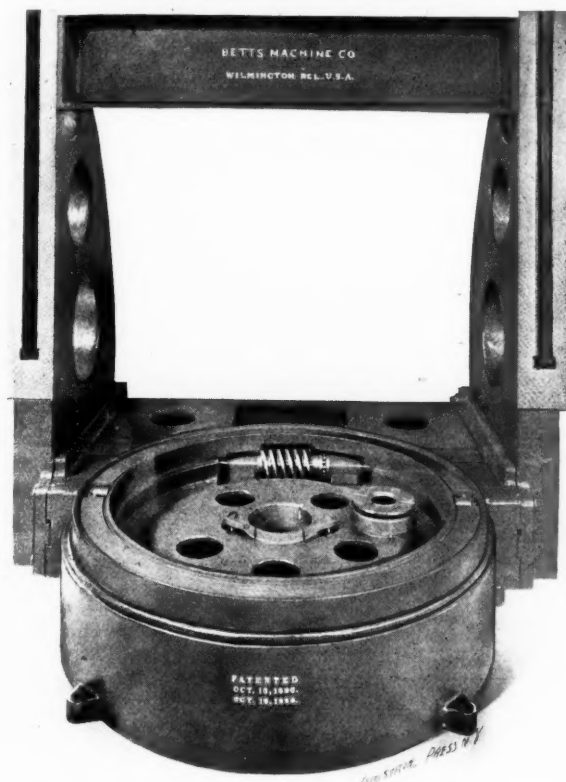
View of Boring Mill with Faceplate removed, showing Worm, Ball Thrust Bearing and Step Bearing.
